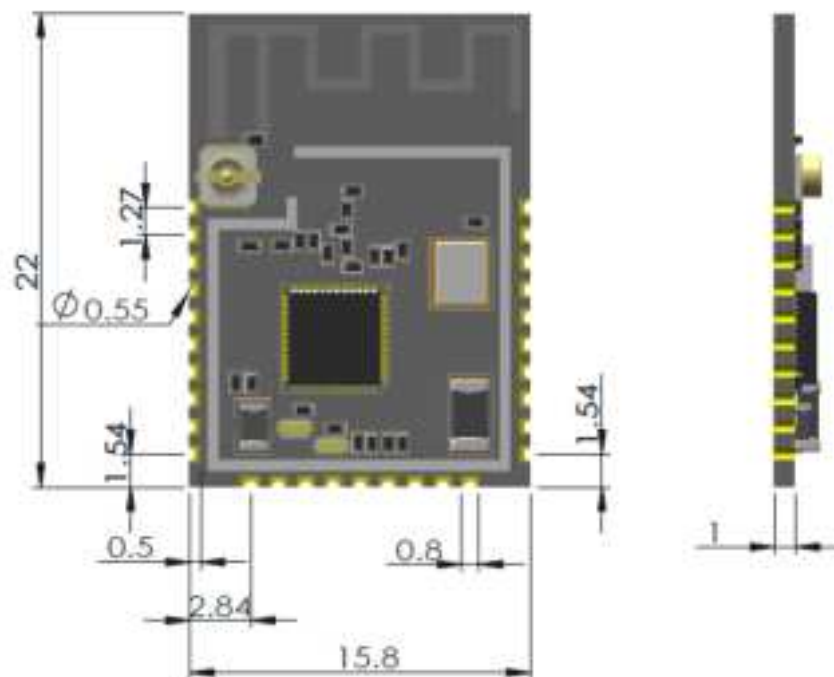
Module dimensions of HM-MT2401 without shield cover
